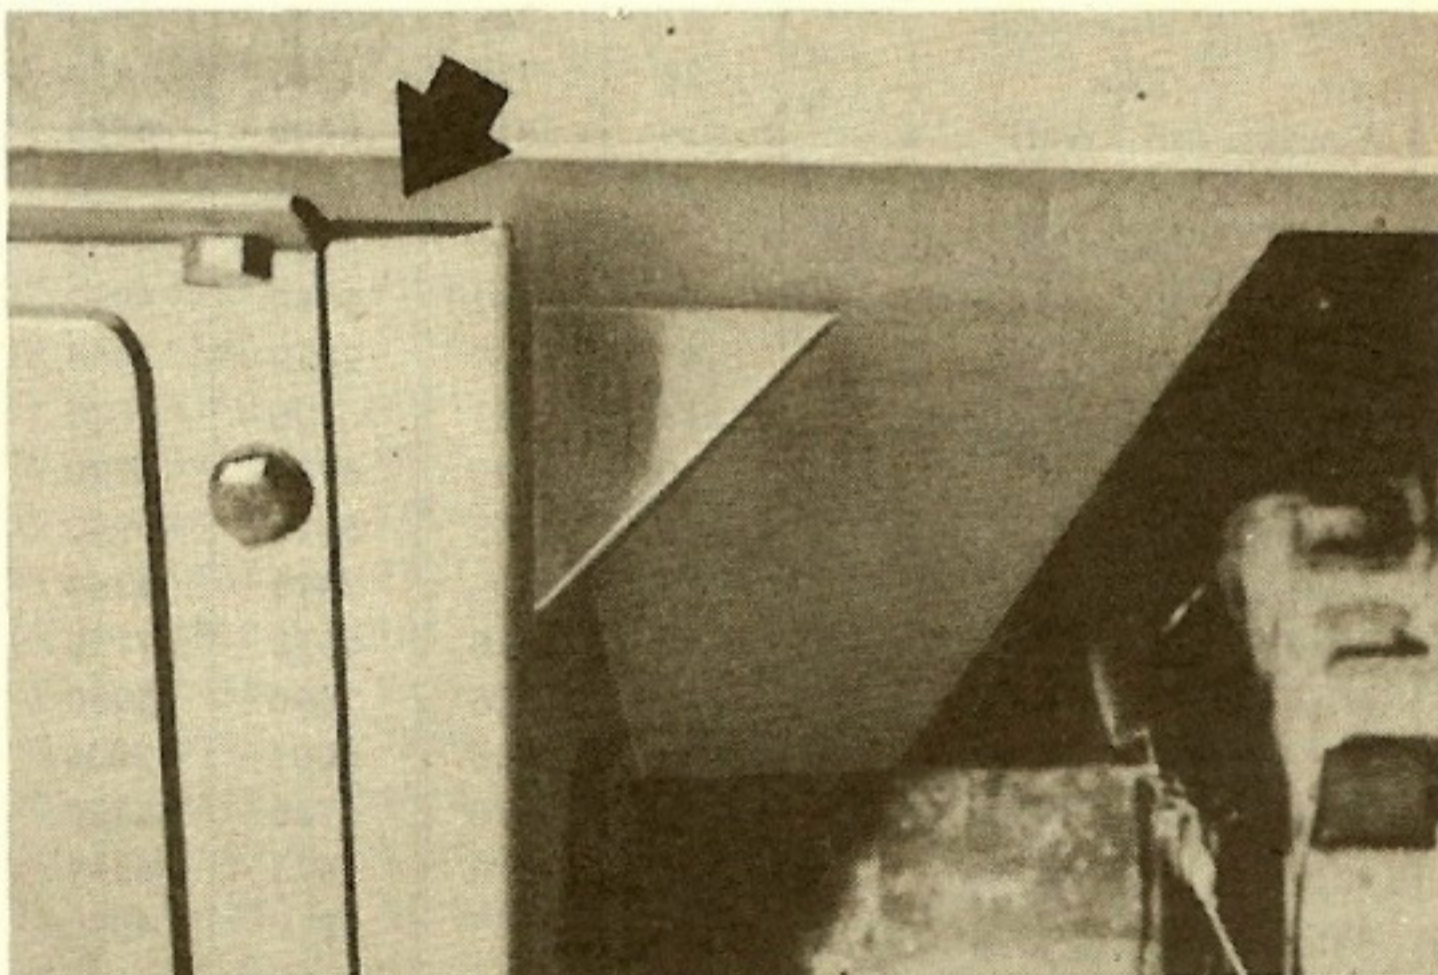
Is your M4 a slot machine? Welding'll keep you dry.
